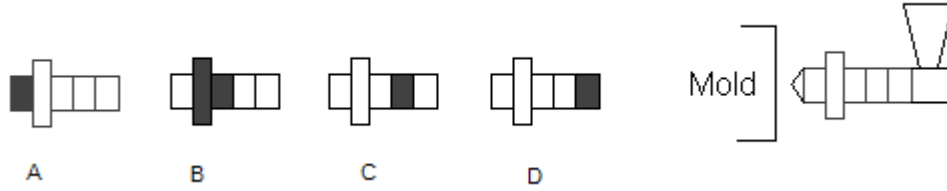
Temperatures setting at injection moulding machine (Battenfeld, Maschinen, Germany).
